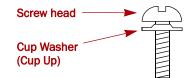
Rear BDA Screw and Cup Washer Assembly (Cup Up)
